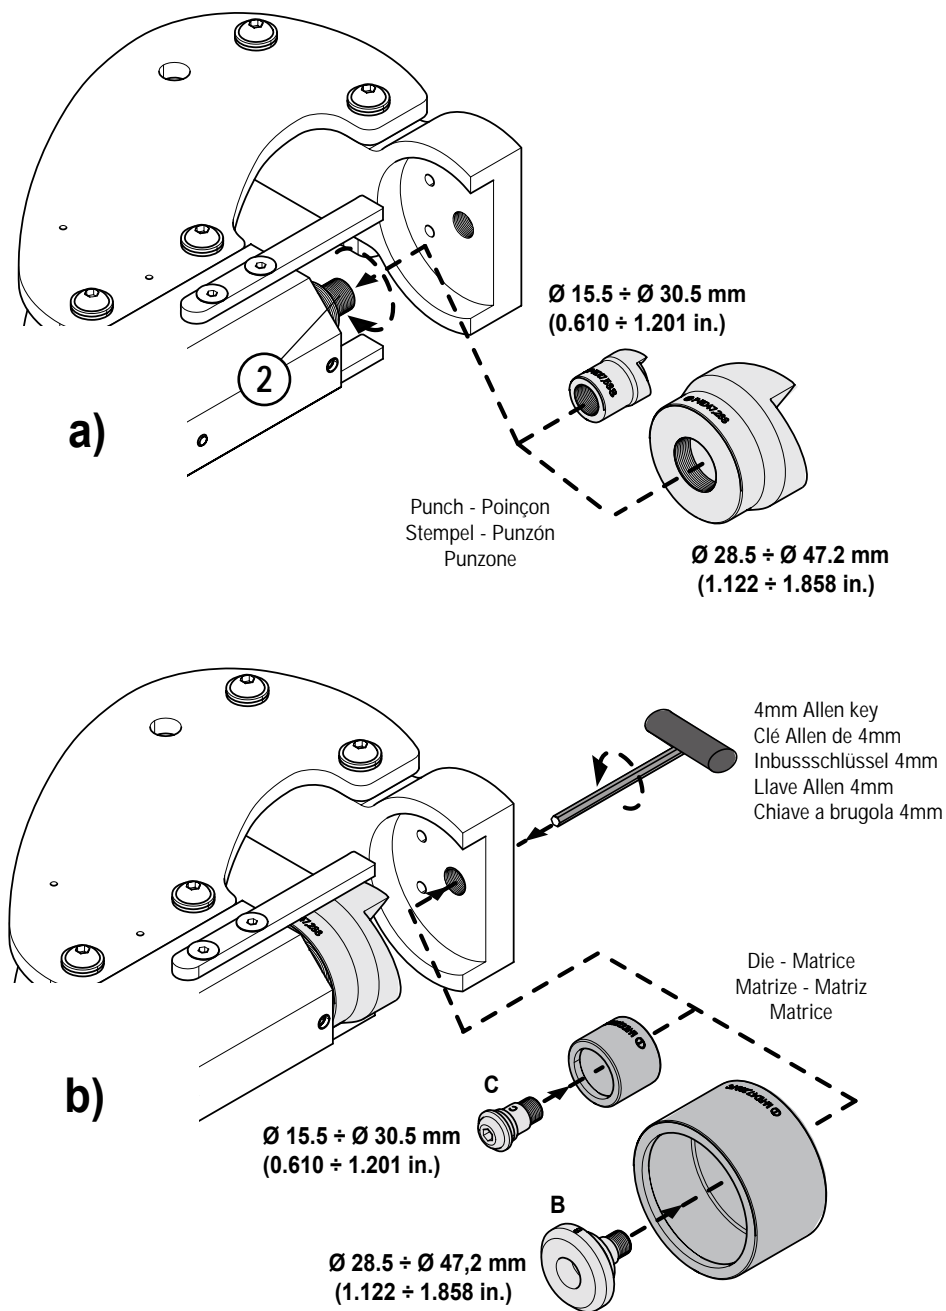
DIE AND PUNCH ASSEMBLY - INSERTION DES MATRICES ET DES POINÇON
